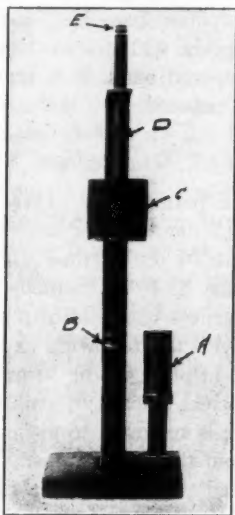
THE RAMMING MACHINE USED TO RAM THE COMPRESSION TEST SPECIMEN
